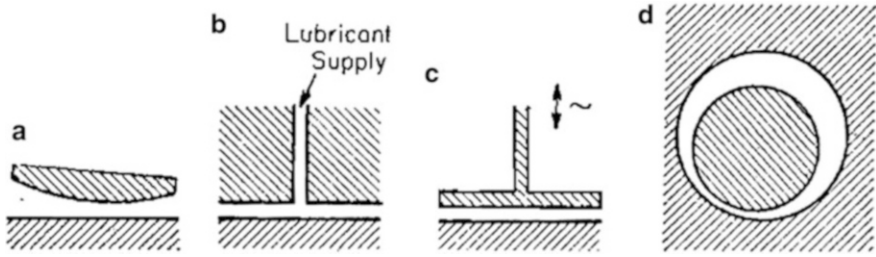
(a) Slider bearing. (b) Externally pressurized bearing. (c) Squeeze bearing. (d) Journal bearing
